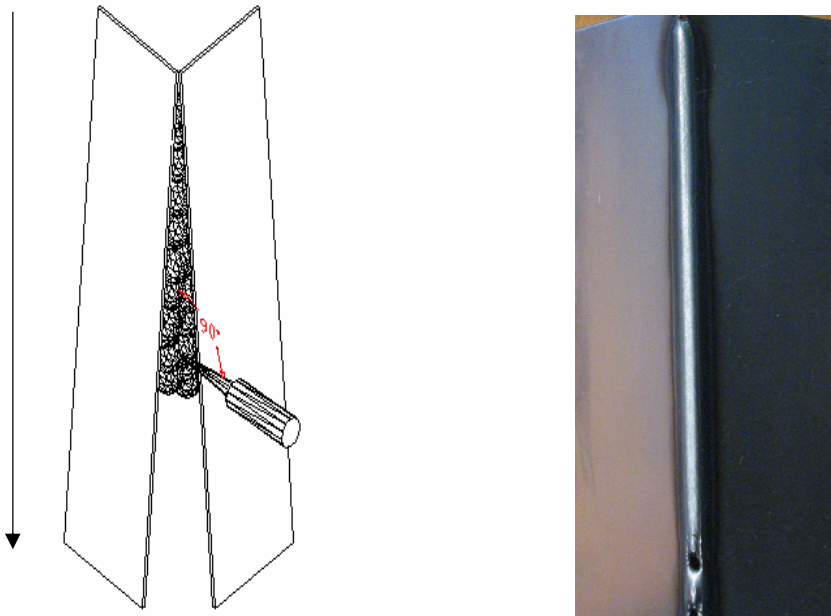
Shows the set-up of zero air gap and the result obtained with MAG-welding.
